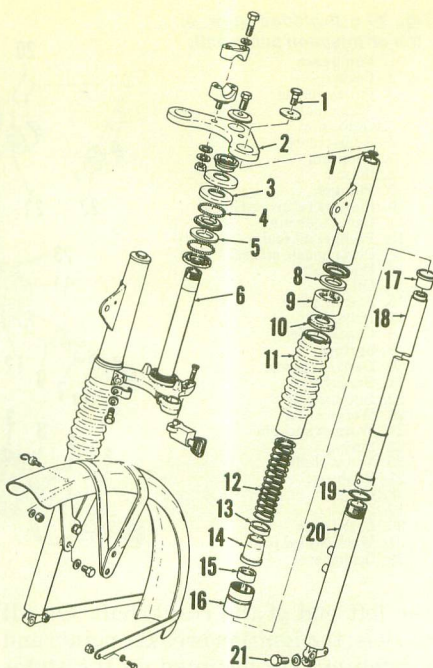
Exploded view of front suspension used on CS3 models.
